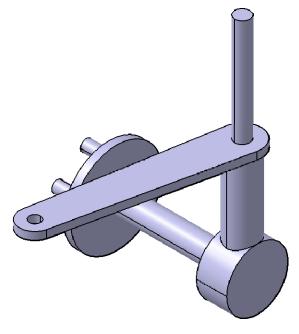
Knuckle Arm-Left (Part 4) of the Steering Wheel Assembly in its isometric view without materials applied (steel).
